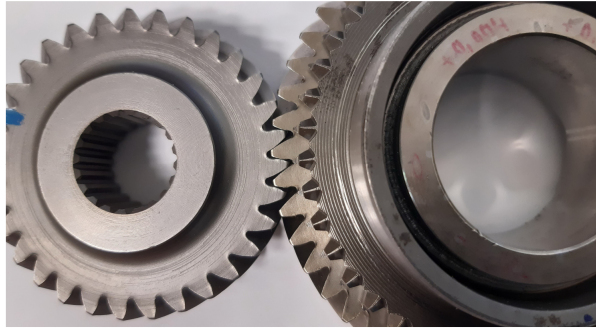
Asymmetric rolled PM gearset of the 6th speed ready for testing
